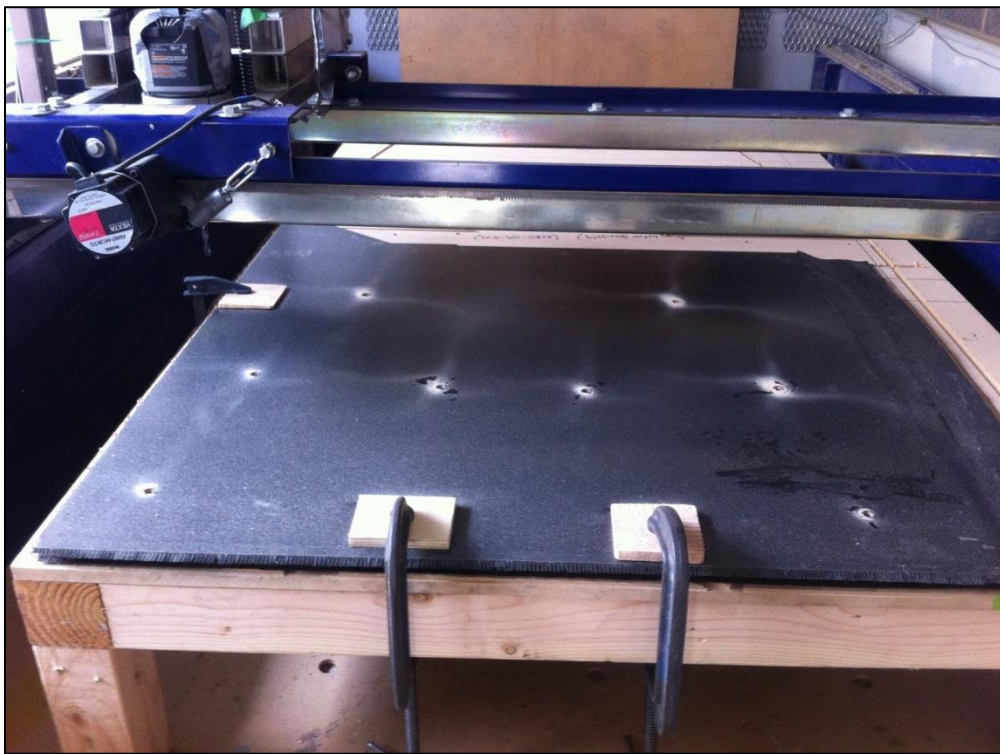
Carbon panel clamped to work table. Insert holes are drilled through both panel and table.
